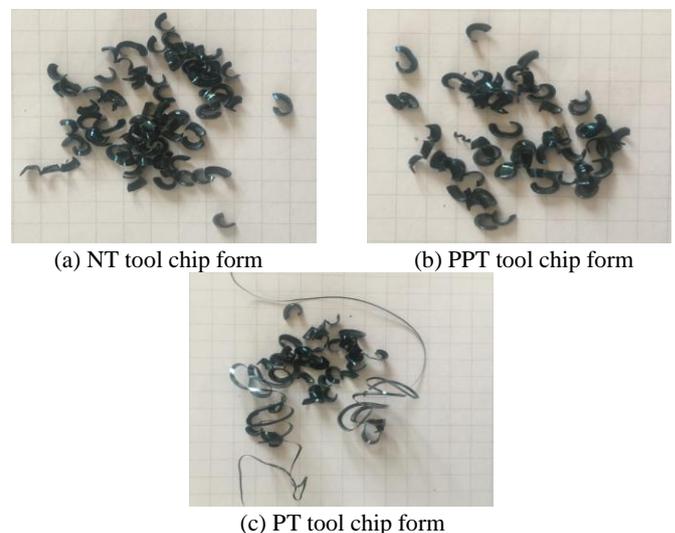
Chip forms of three samples, (a) NT tool chip form, (b) PPT tool chip form, (c) PT tool chip form.
